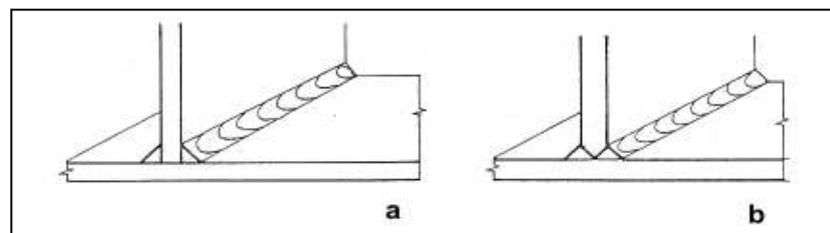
Typical welds: (a) Fillet weld and (b) butt weld
